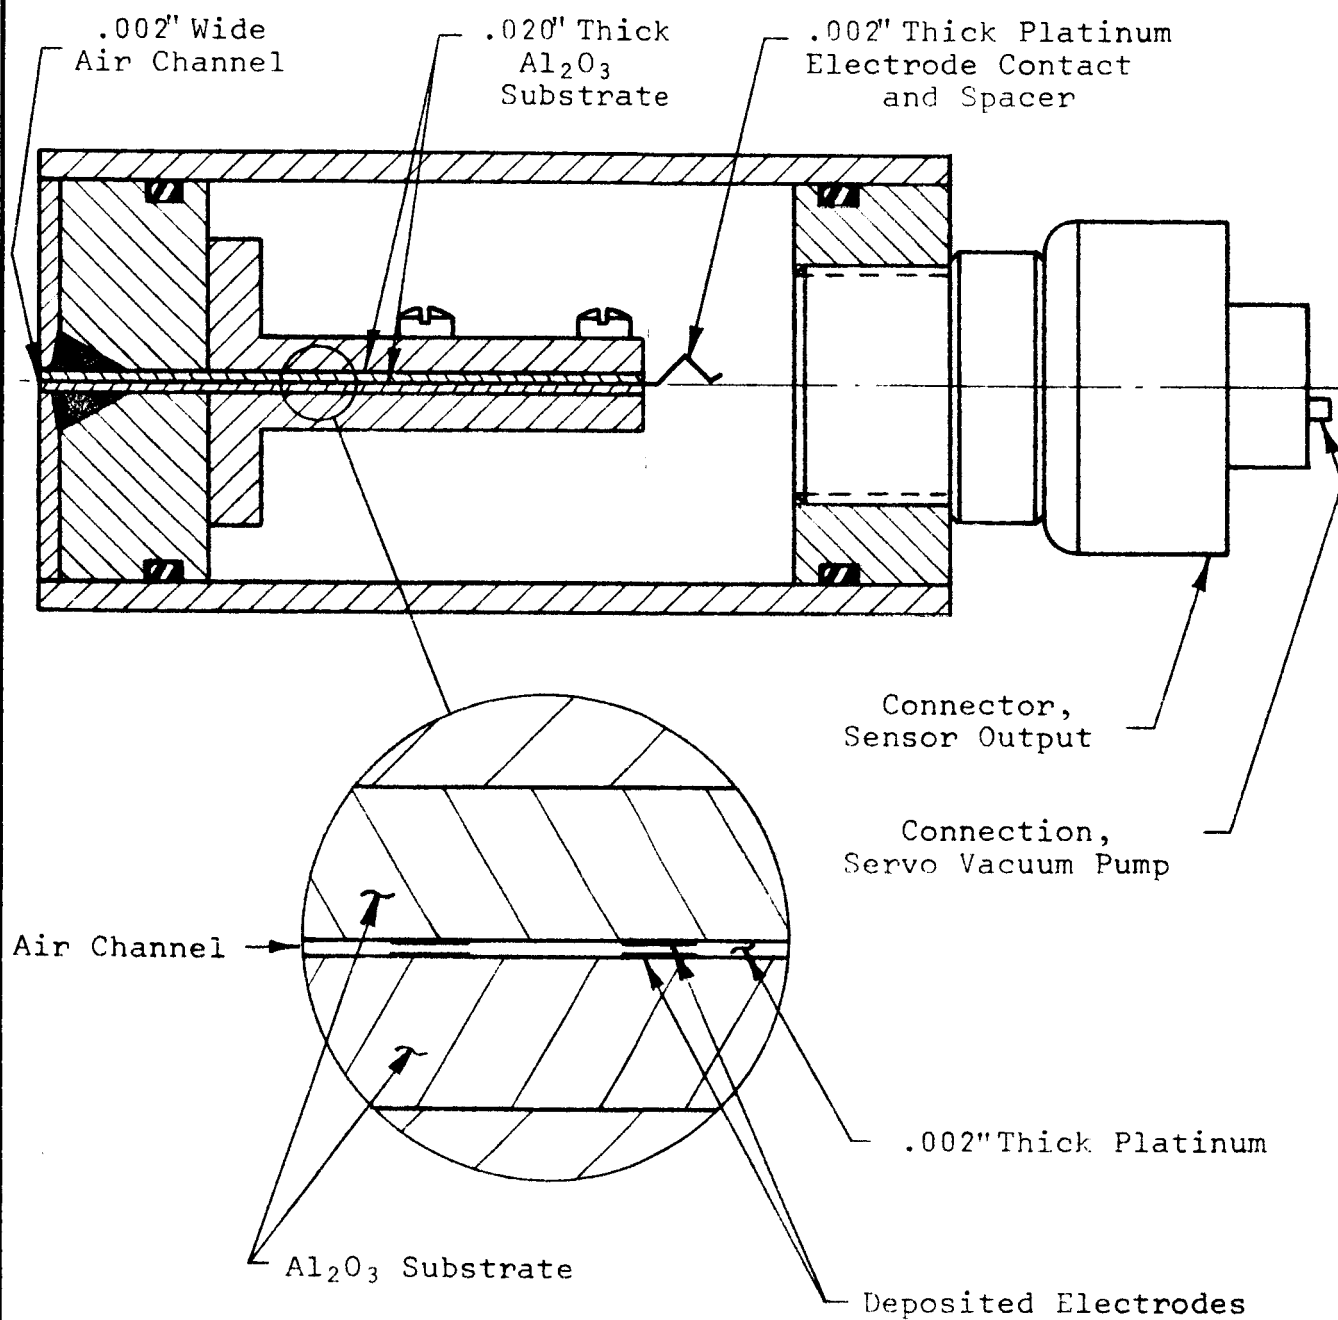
FLAT PLATE ASSEMBLY SENSOR
